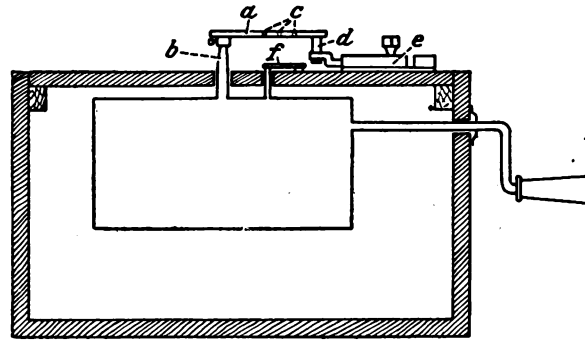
Diagrammatic cross-section of gramophone spring motor housed in box: (a) perforated crank; (b) spindle of motor; (c) three holes in crank; (d) pin; (e) offset bolt, to act as stop and release; (f) speed control.
